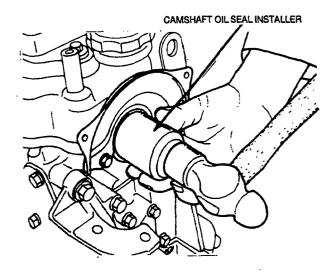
INSTALLING CAMSHAFT OIL SEAL
